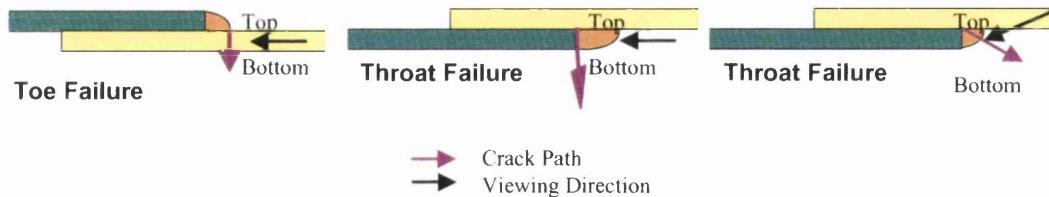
Viewing Angles for the Fracture Surface Examination
